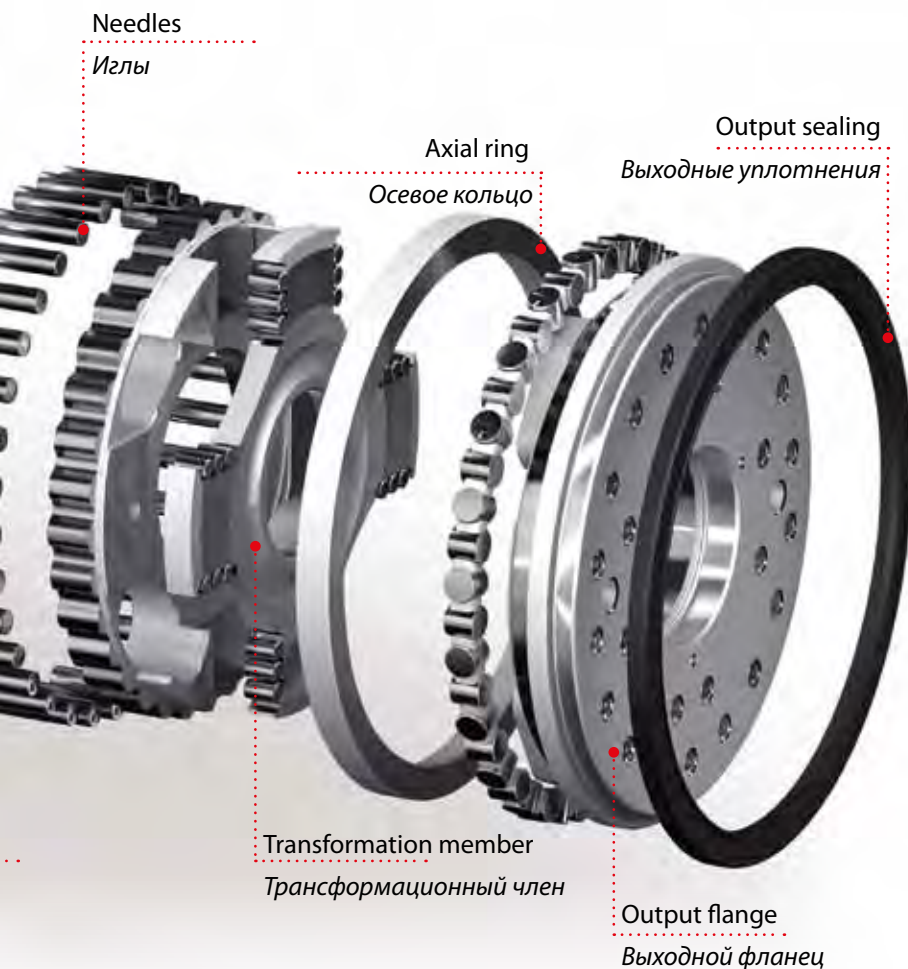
Components of TwinSpin reduction gears | Составные части редуктора TwinSpin
